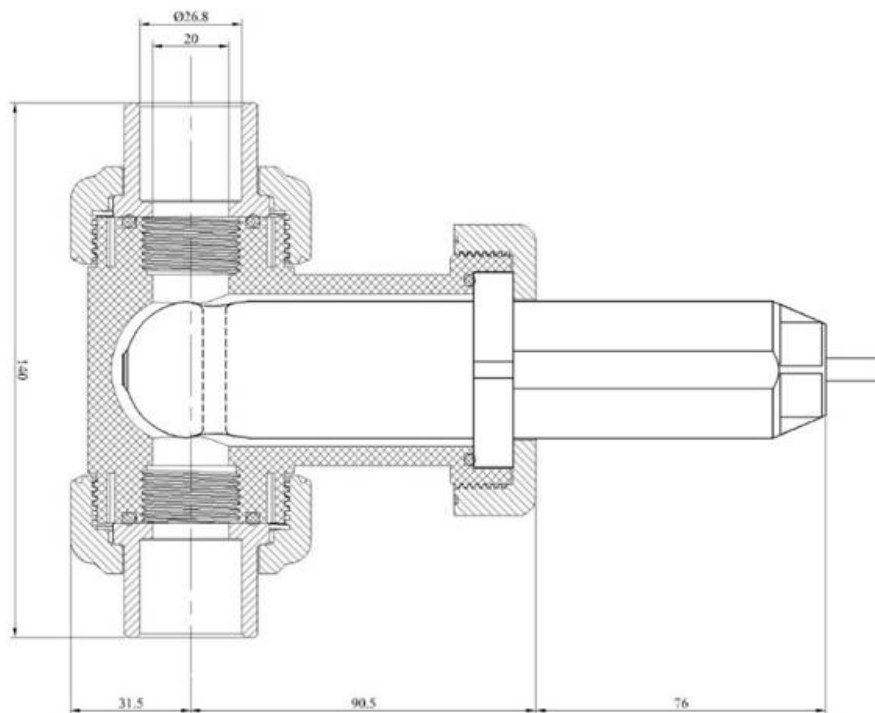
Dimension of the ST-565 Series sensor and the ST-001 Tee Assembly (mm)
